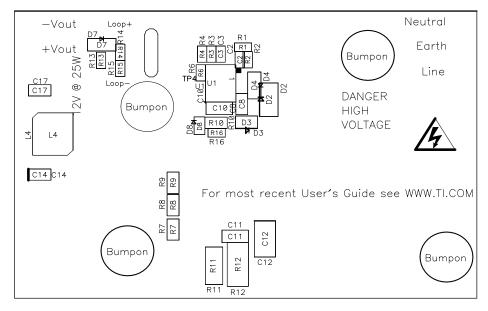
Bottom Layer Component Placement of UCC28610EVM-474 Rev. A
